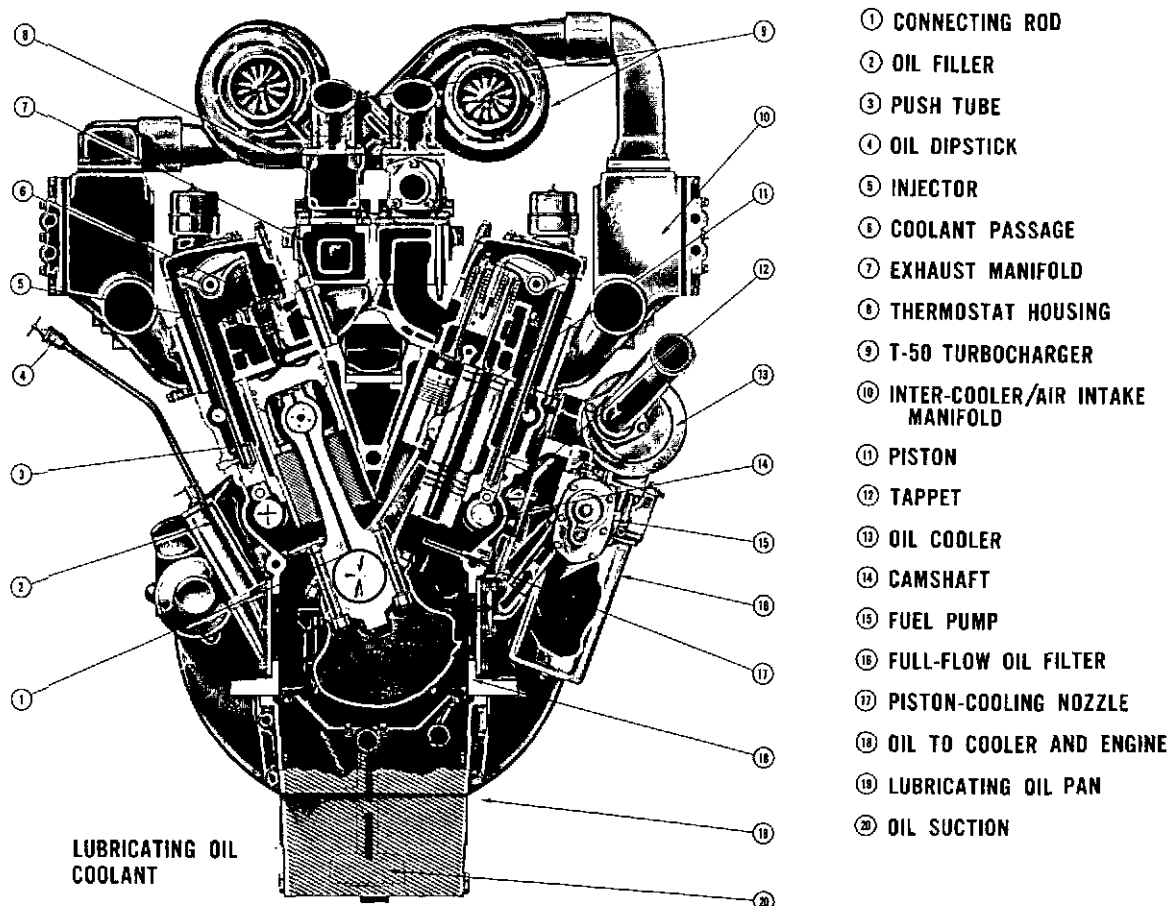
, CWC12. Lubricating oil and coolant flow — end view
